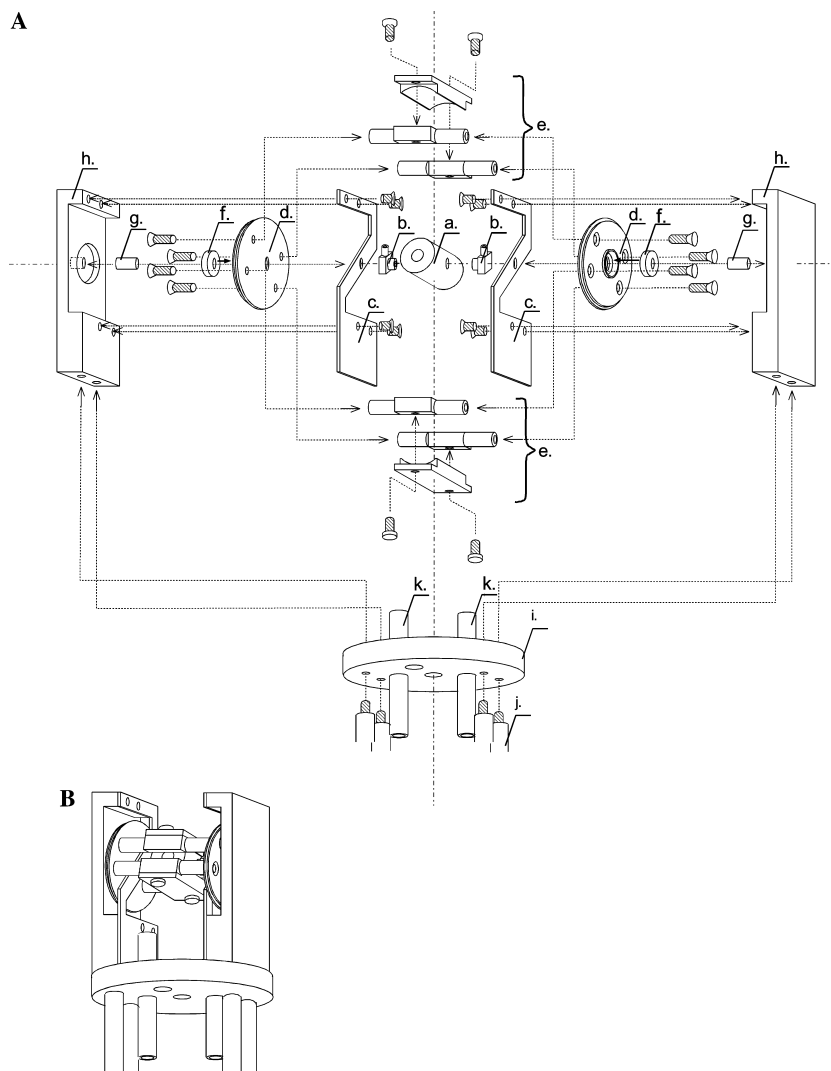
Sketches of the upper attachment. (A) Parts: a, rotor housing; b, air inlet; c, panel; d, pulley; e, clamp; f, bearing; g, pulley axis; h, pulley holder; i, pedestal; j, prop; and k, air pipe. (B) Assembly; rf components are omitted.
